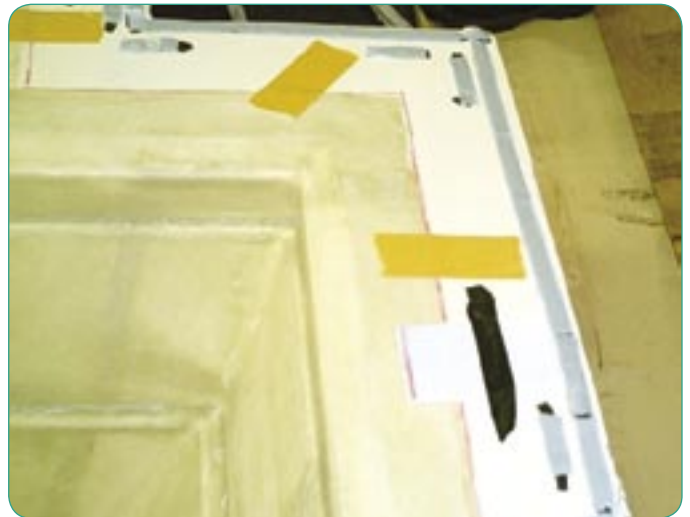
The strips that hold the fibers in place on the flange and the tacky-tape for the vacuum bag.
